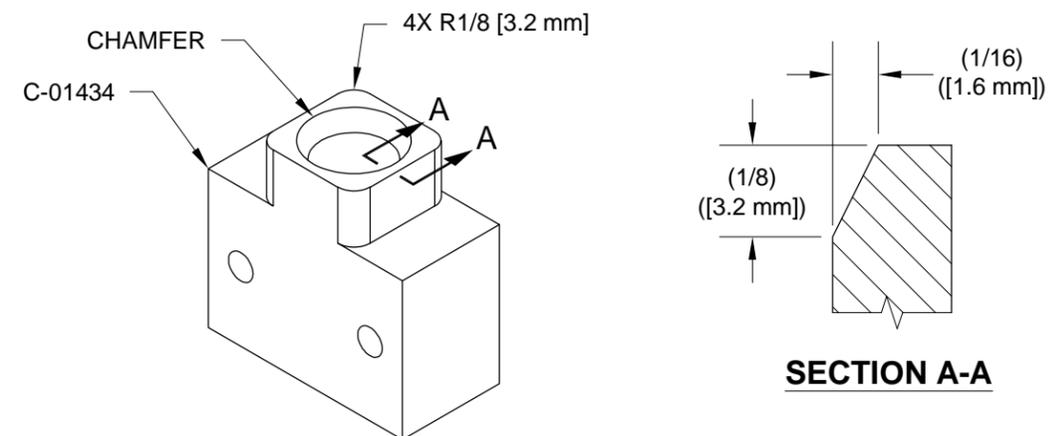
RADIUS & CHAMFER PIVOT BLOCK
